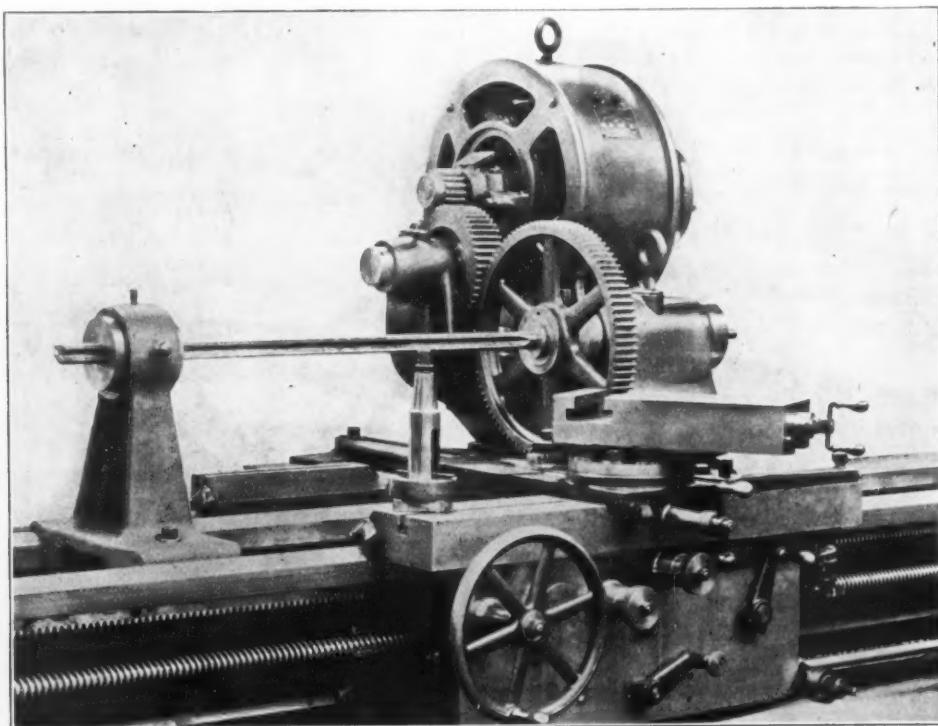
A Motor Driven Deep Drilling Lathe Attachment Made by the Lodge & Shipley Machine Tool Company, Cincinnati, Ohio.
